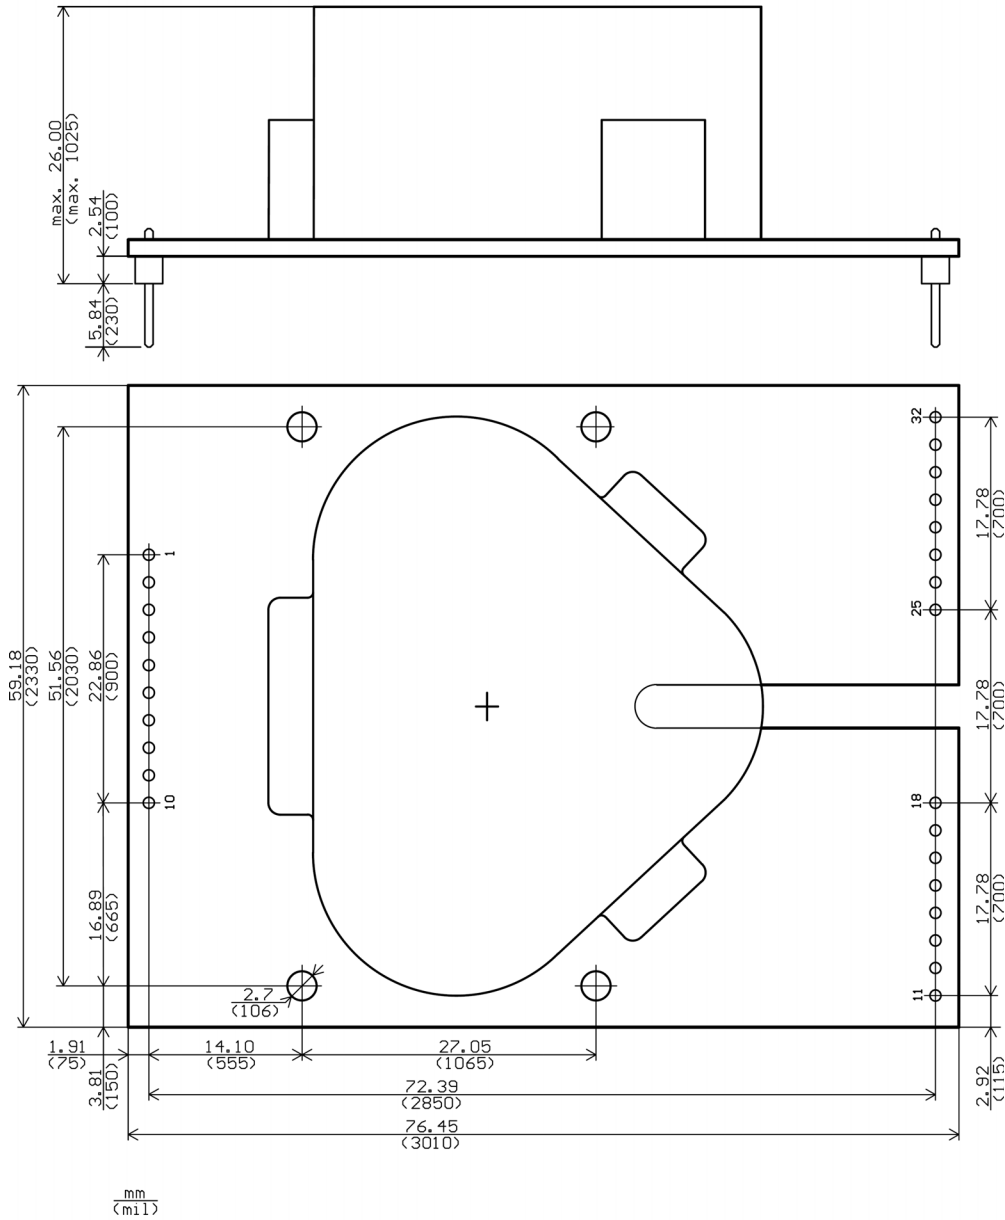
Mechanical drawing of 2SC0535T2Ax-33
